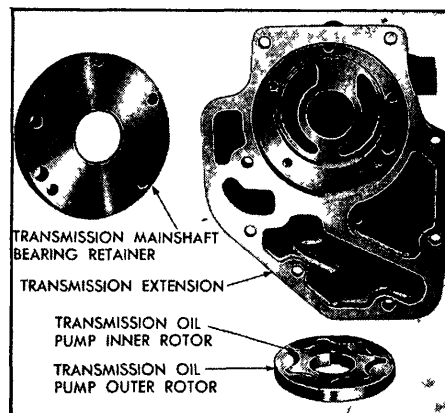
Oil pump parts and mainshaft rear bearing retainer. 1949-52 automatic transmission
